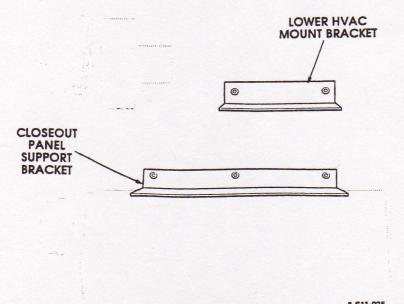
Closeout Panel And Lower HVAC Mount Brackets.
